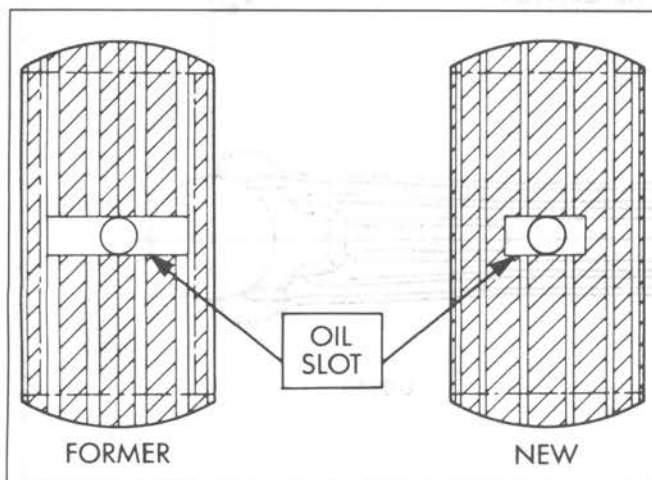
Bearing Faces (I.D.) of Former and New Piston Pin Bushings
